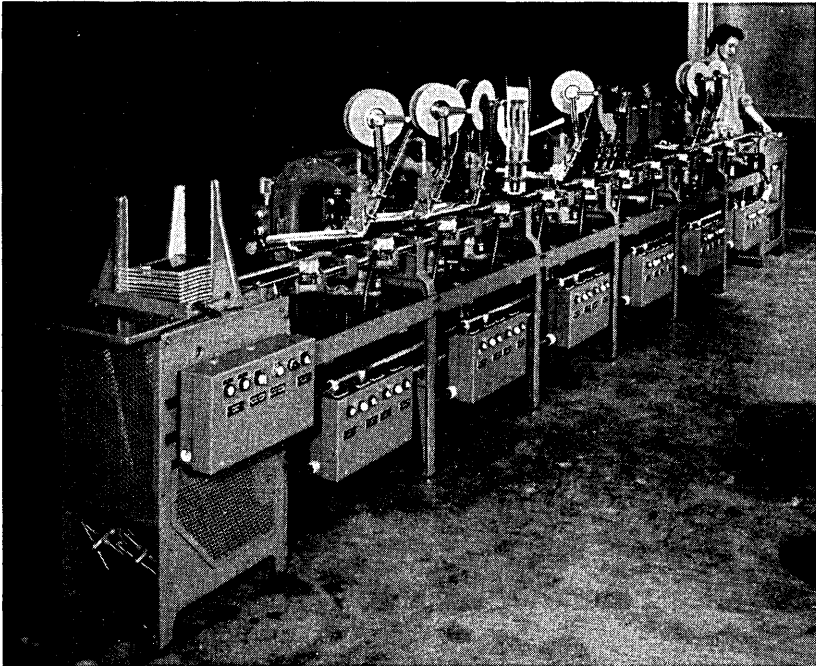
The United Shoe Machinery Corporation assembly line
